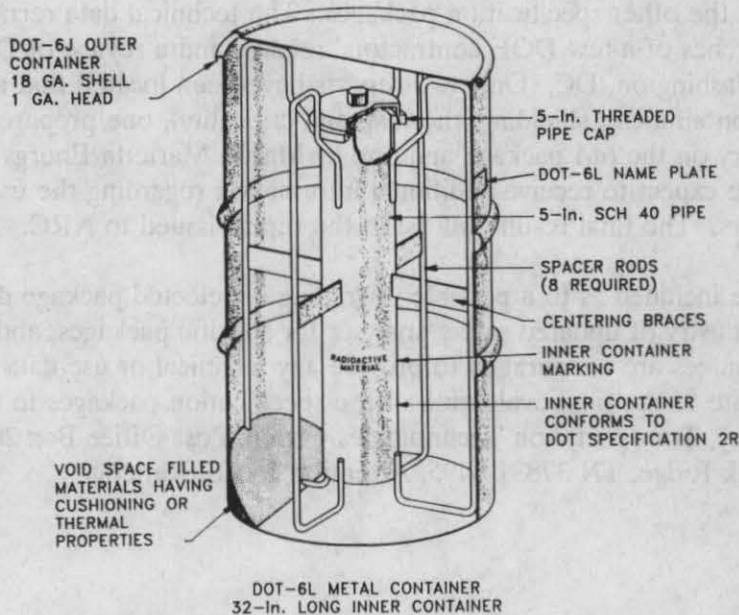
DOT-6L metal container, 32-in.-long inner container.
